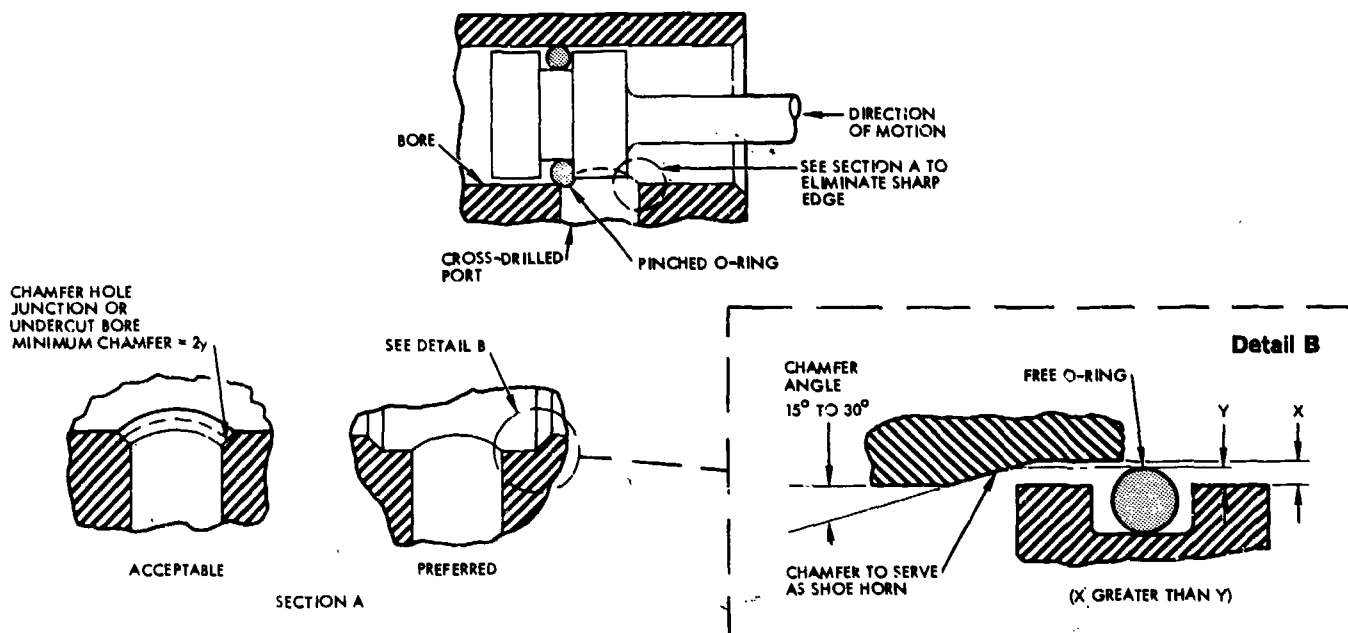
Gland Chamfer Techniques to Prevent O-Ring Damage
